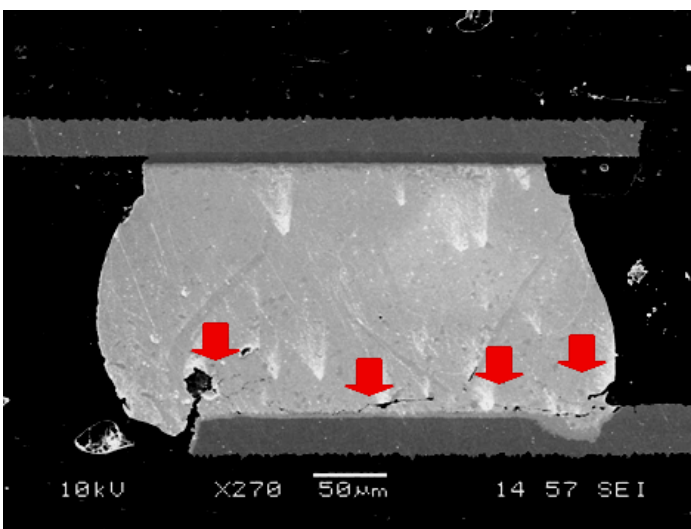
Solder joint cracking on underfill A after thermal cycling.
